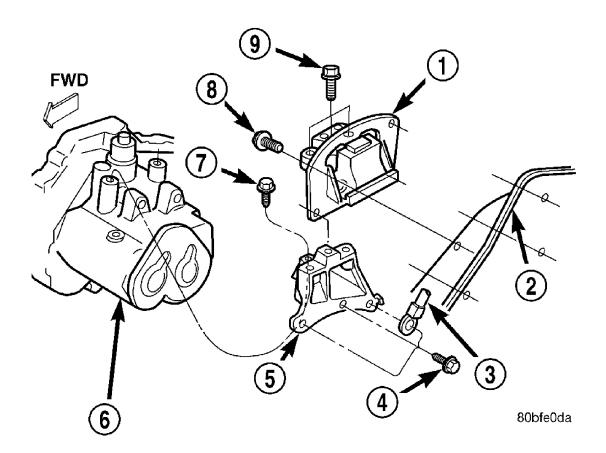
View Of Left Side Mount - Typical Courtesy of CHRYSLER LLC
